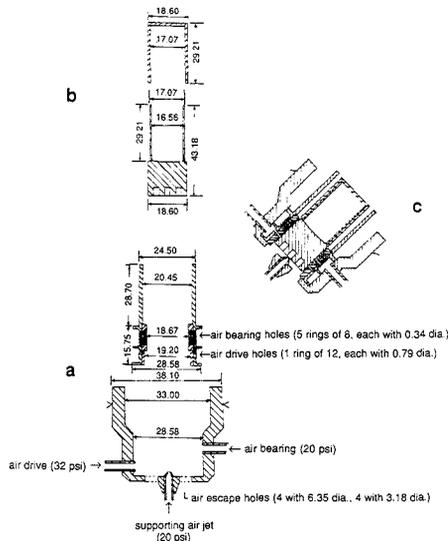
Diagram of the 6-cm³ MAS system. All dimensions are shown in millimeters. (a) Details of stator in a partially exploded view: lower, Delrin or Kel-F piece, with threaded Delrin or Kel-F air-bearing and air-drive tubing (5.33 mm o.d.; 3.18 mm i.d.) and glass air jet tubing (5 mm o.d., 2 mm i.d., with 0.34 mm i.d. outlet); upper, brass inner piece inserted into Delrin or Kel-F outer piece. (b) Details of rotor shown in exploded view: upper, zirconia sleeve; lower, single-piece Delrin or Kel-F chamber. (c) Overall assembled system.
